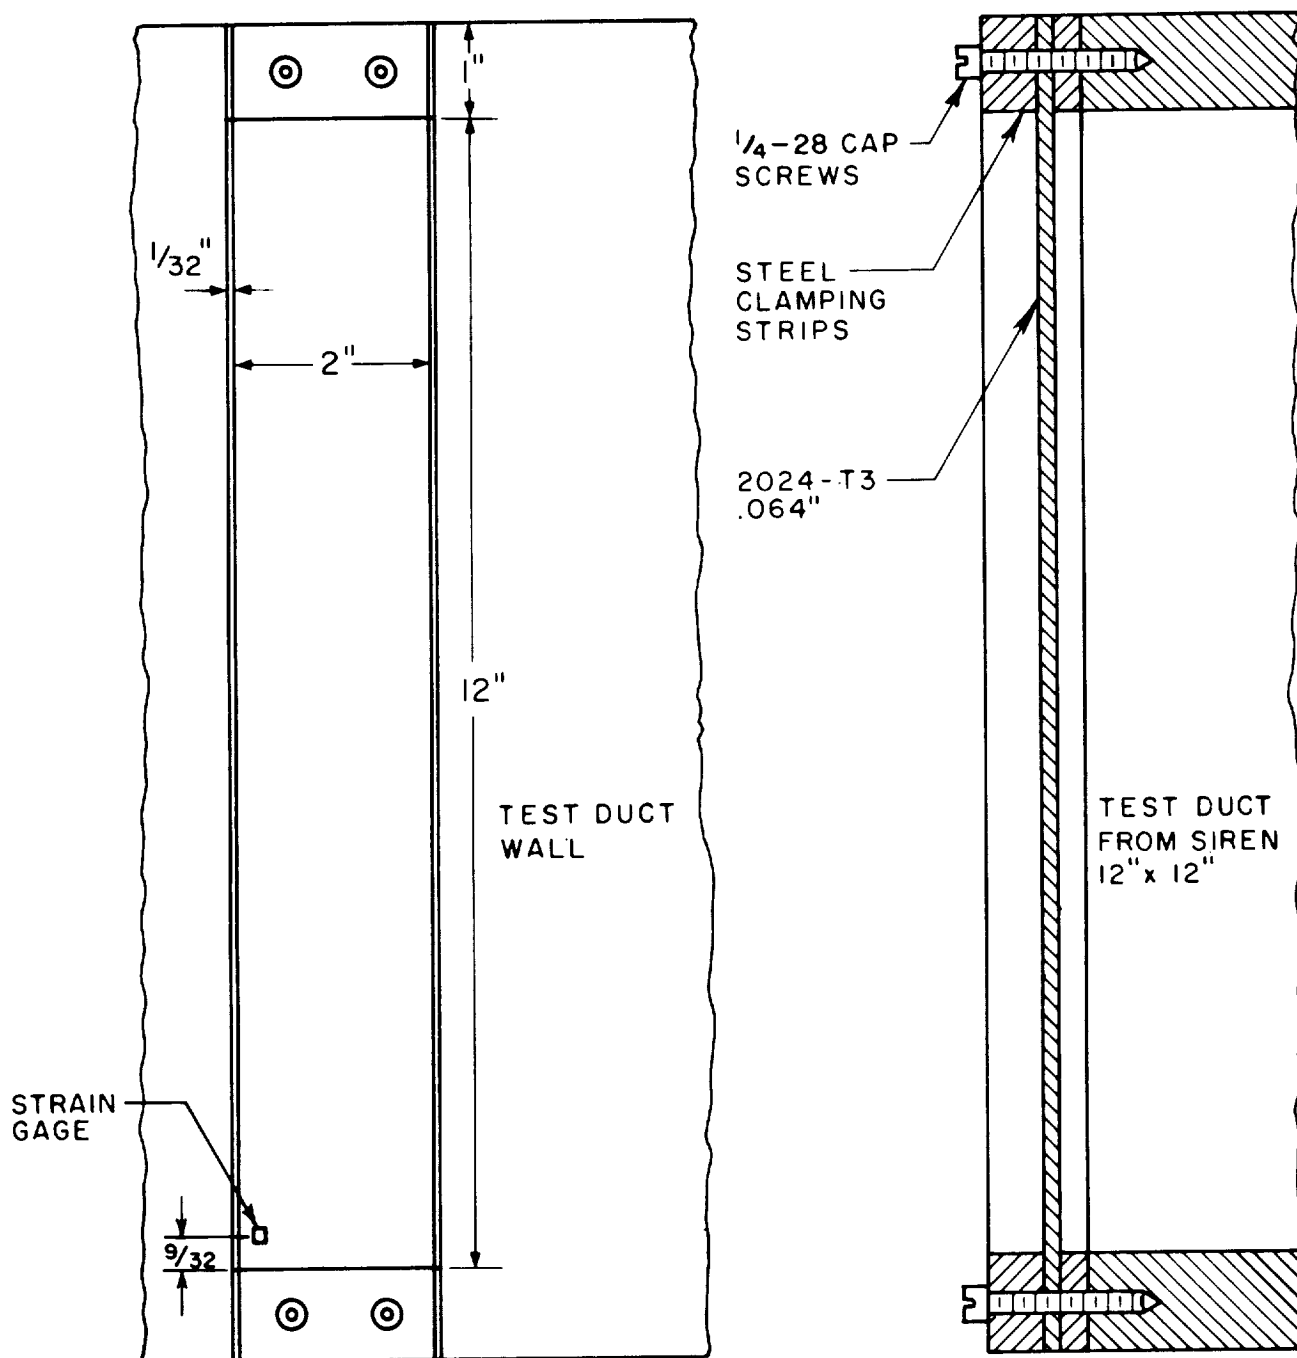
DIMENSIONS AND MOUNTING DETAILS FOR SMITH'S EXPERIMENTAL PANEL (REF.1)
